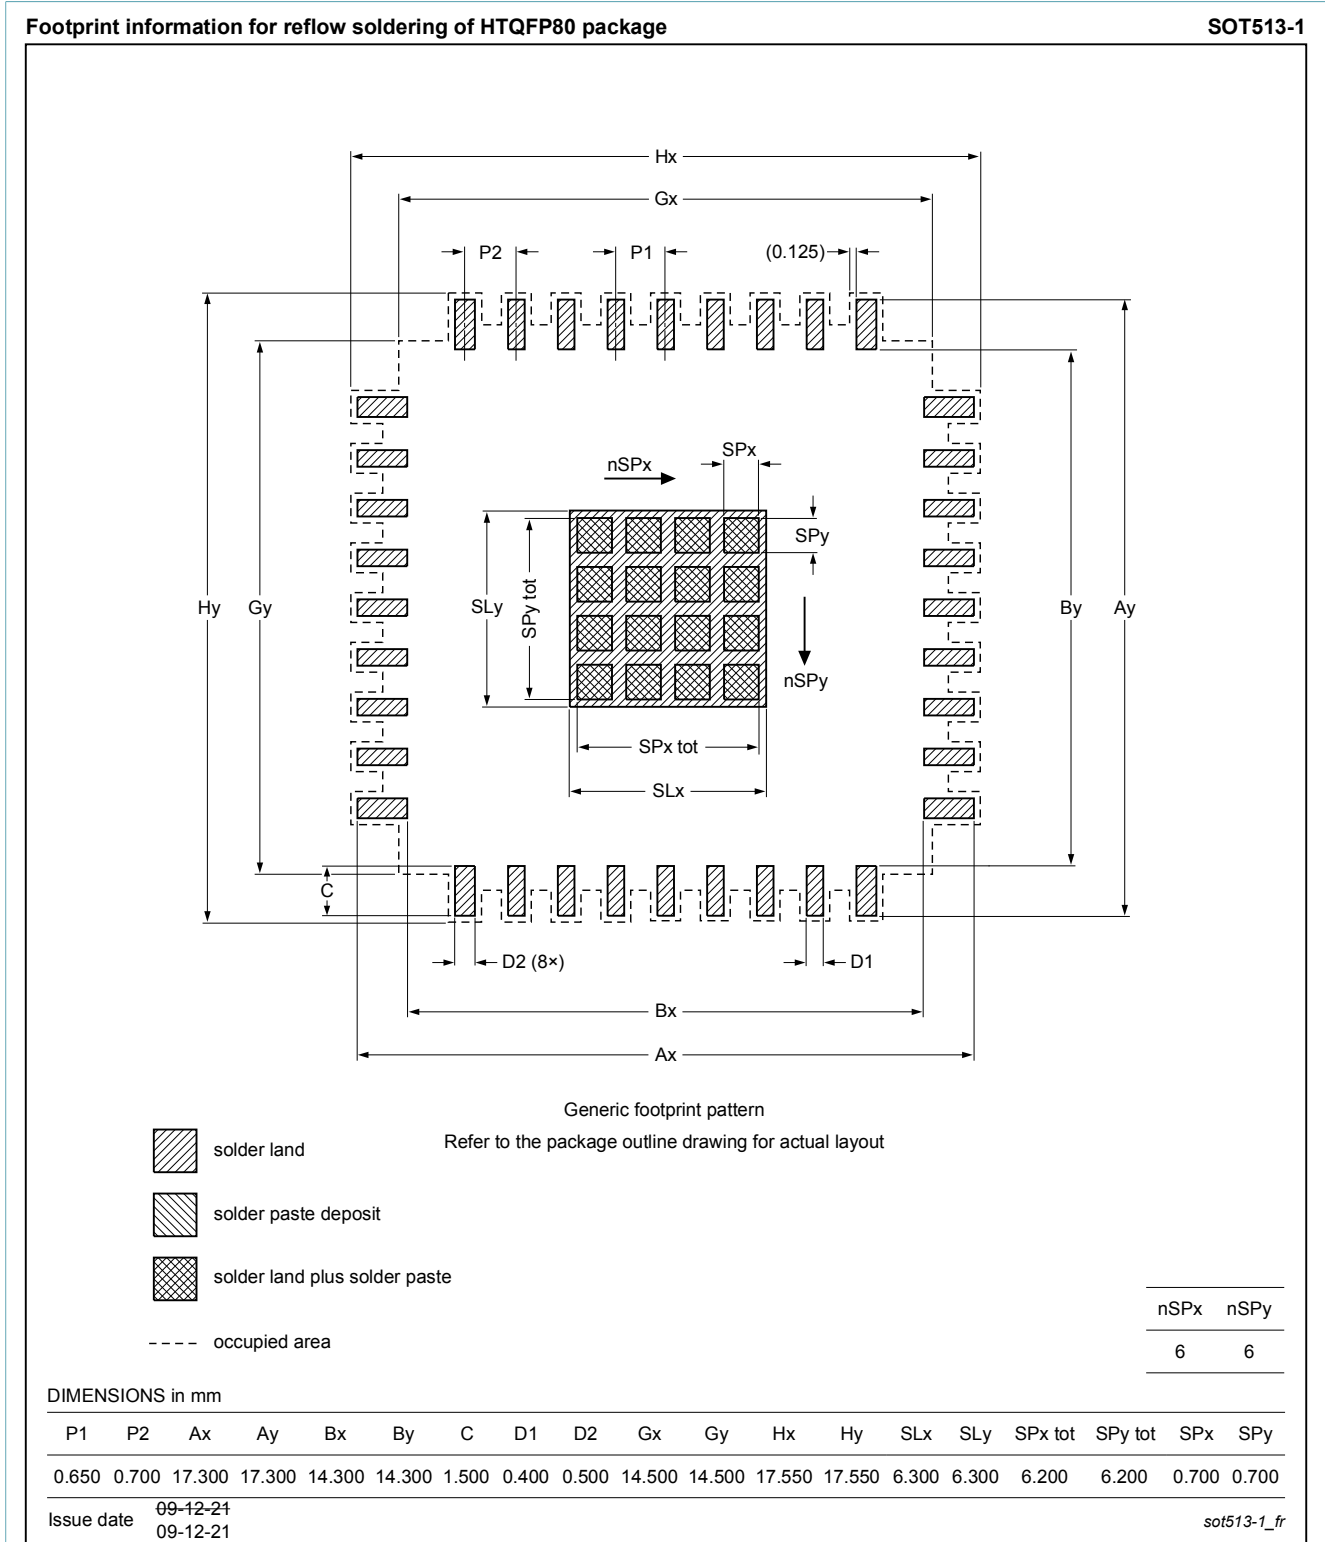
Reflow soldering footprint for HTQFP80 (SOT513-1)
